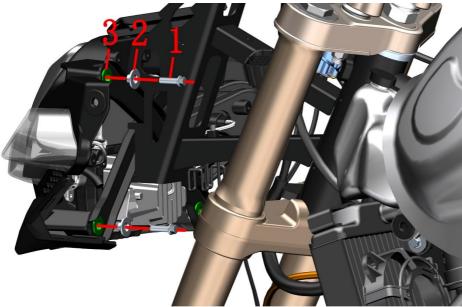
FRONT FORK		Headlight assembly 1	CHK	Q
